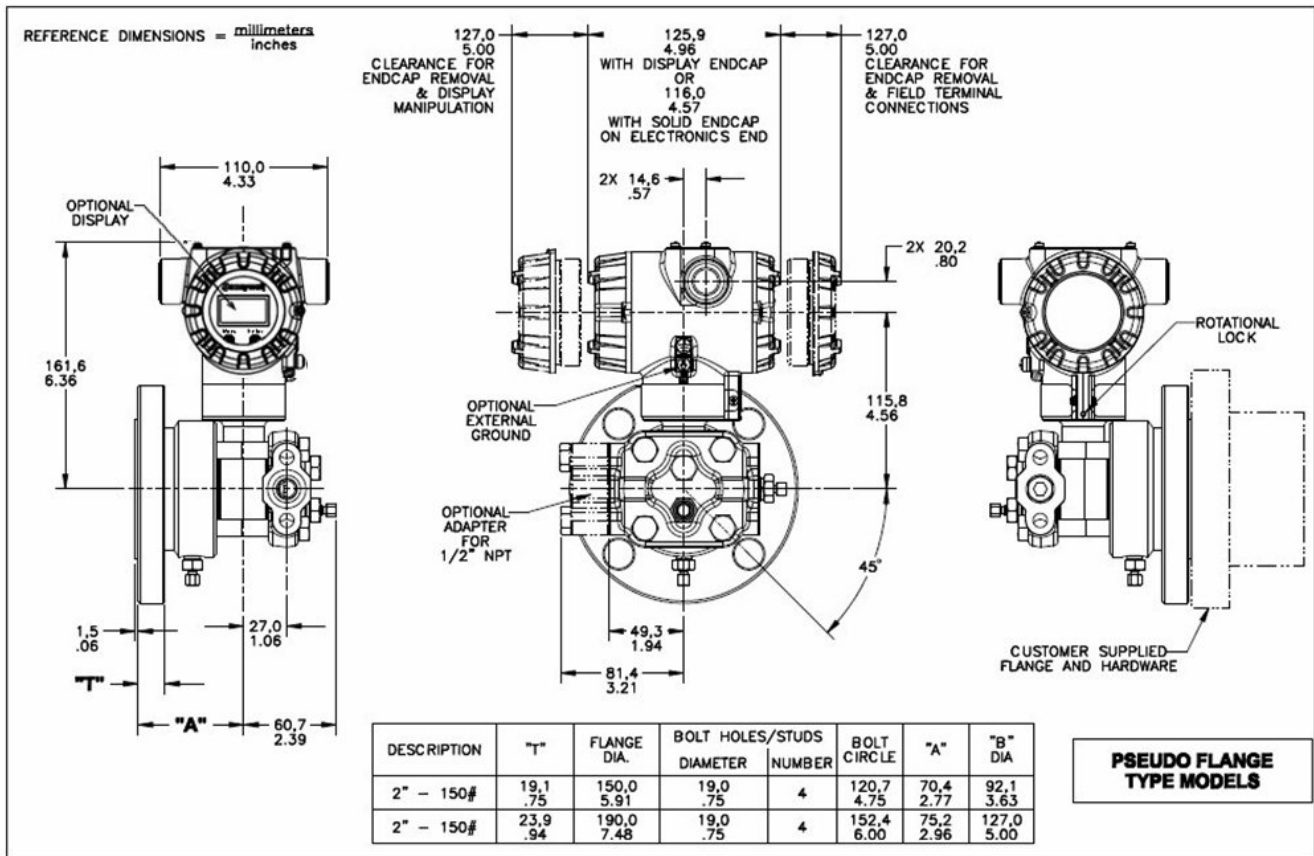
Typical mounting dimensions for pseudo flange type models STF72P and STF73P
